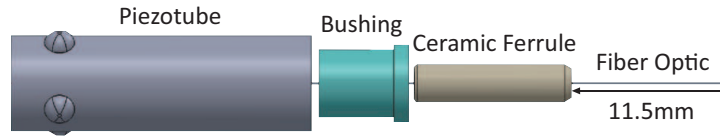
Exploded view of the cantilever components. The solder balls on the piezotube are visible but the quadrant electrodes are not shown. The optical fiber is seated inside a ceramic ferrule which press-fits into the bushing. The bushing is glued to the inside of the piezotube.
